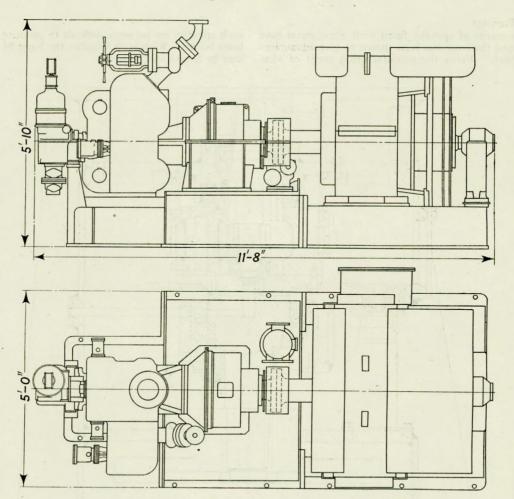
kW. marine turbo-generator with 16,500/600 r.p.m. epicyclic gear
